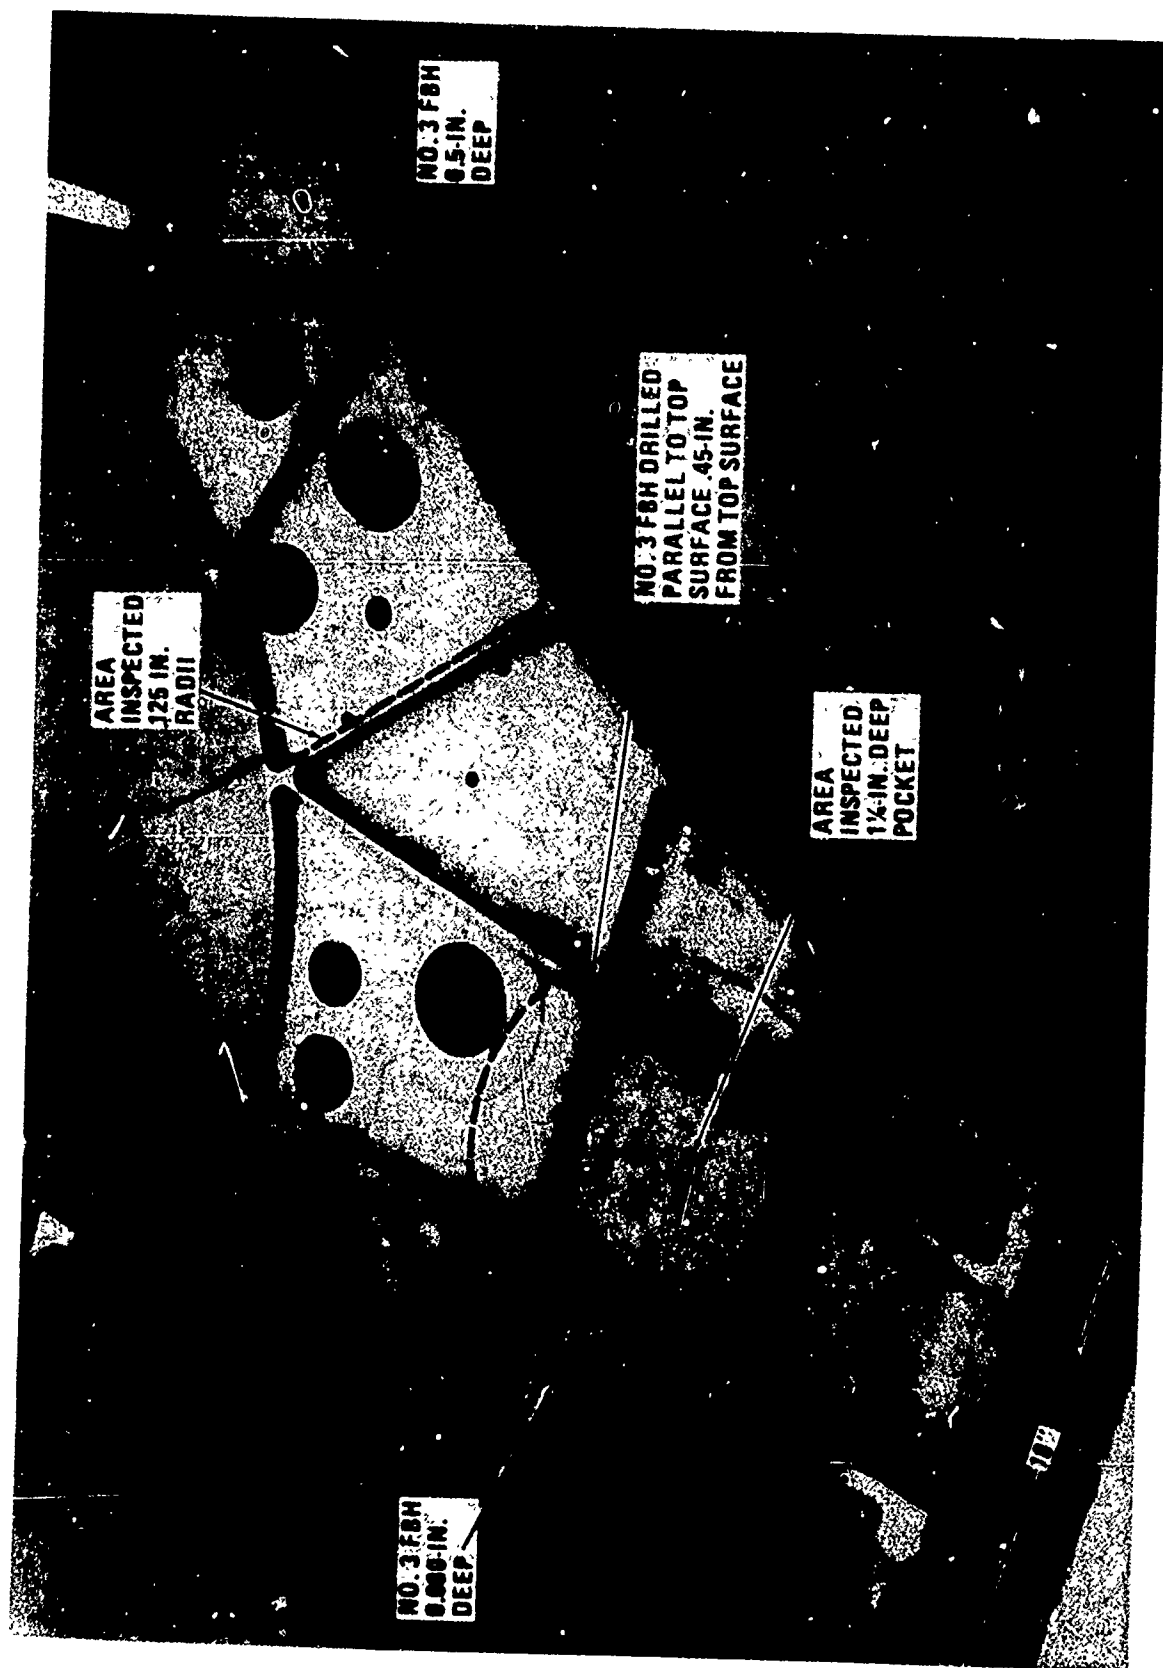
F-16 Bulkhead Forging With FBH and Areas Inspected
